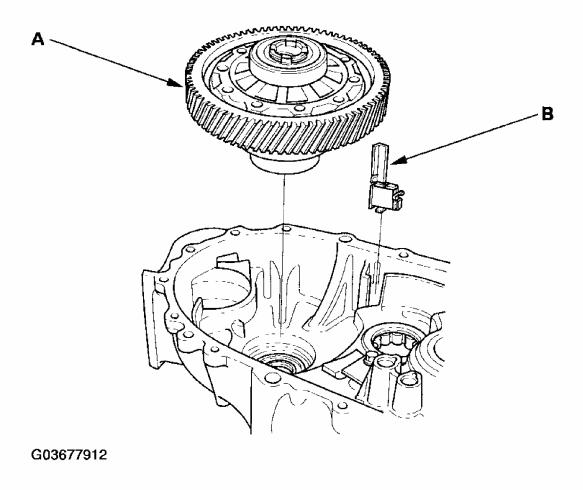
Removing Differential Assembly And Magnet Courtesy of AMERICAN HONDA MOTOR CO., INC.
